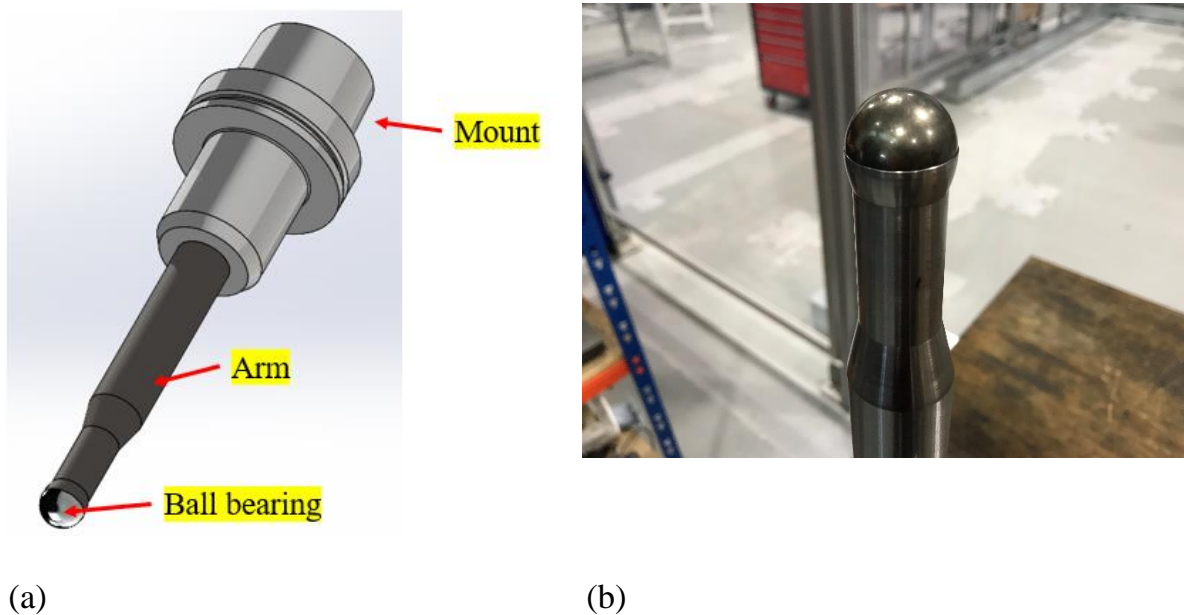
Roller ball tool: (a) Tool assembly; (b) Ball bearing within chamber.
